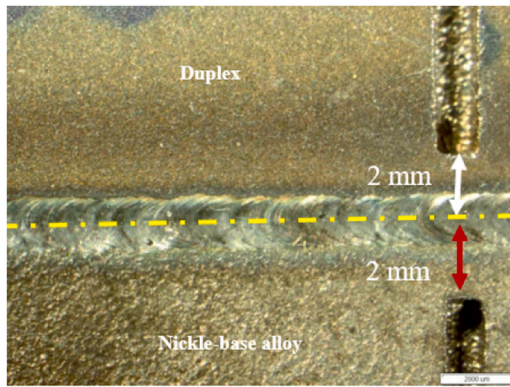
Location of thermocouples placement for temperature measurement related to the weld bead center.
